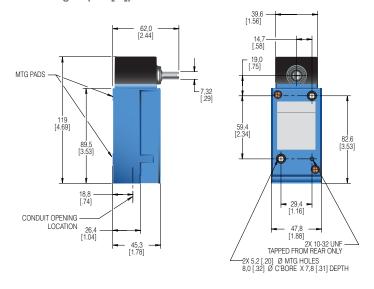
MICRO SWITCH™ HDLS side rotary (single pole) dimensions
